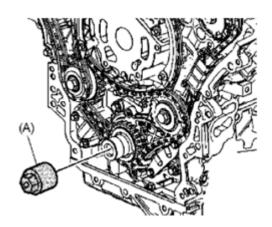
Identifying Crankshaft Rotation Socket Courtesy of SUZUKI OF AMERICA CORP.
